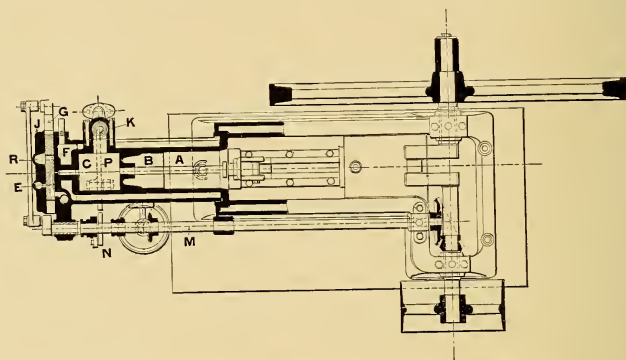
PLAN VIEW OF THE ORIGINAL OTTO SLIDE-VALVE ENGINE.
